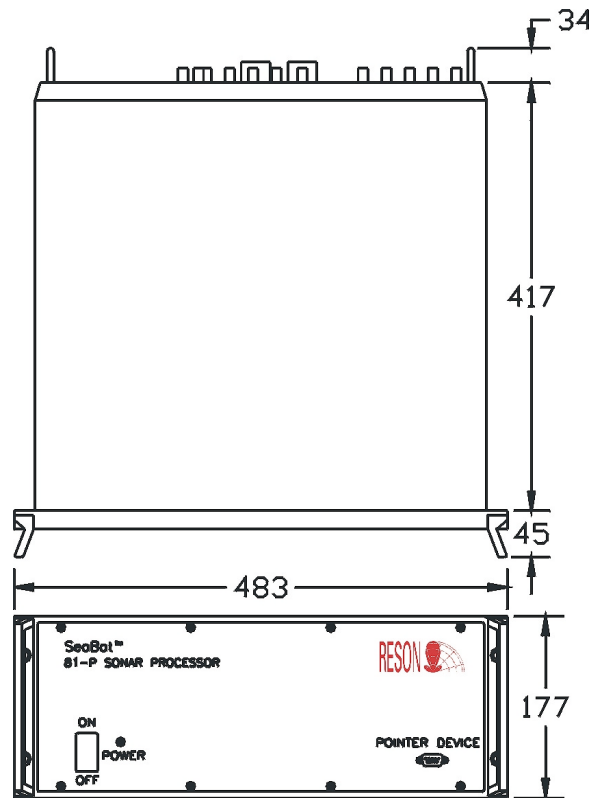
, 81-P Sonar Processor Dimensions (in mm)
